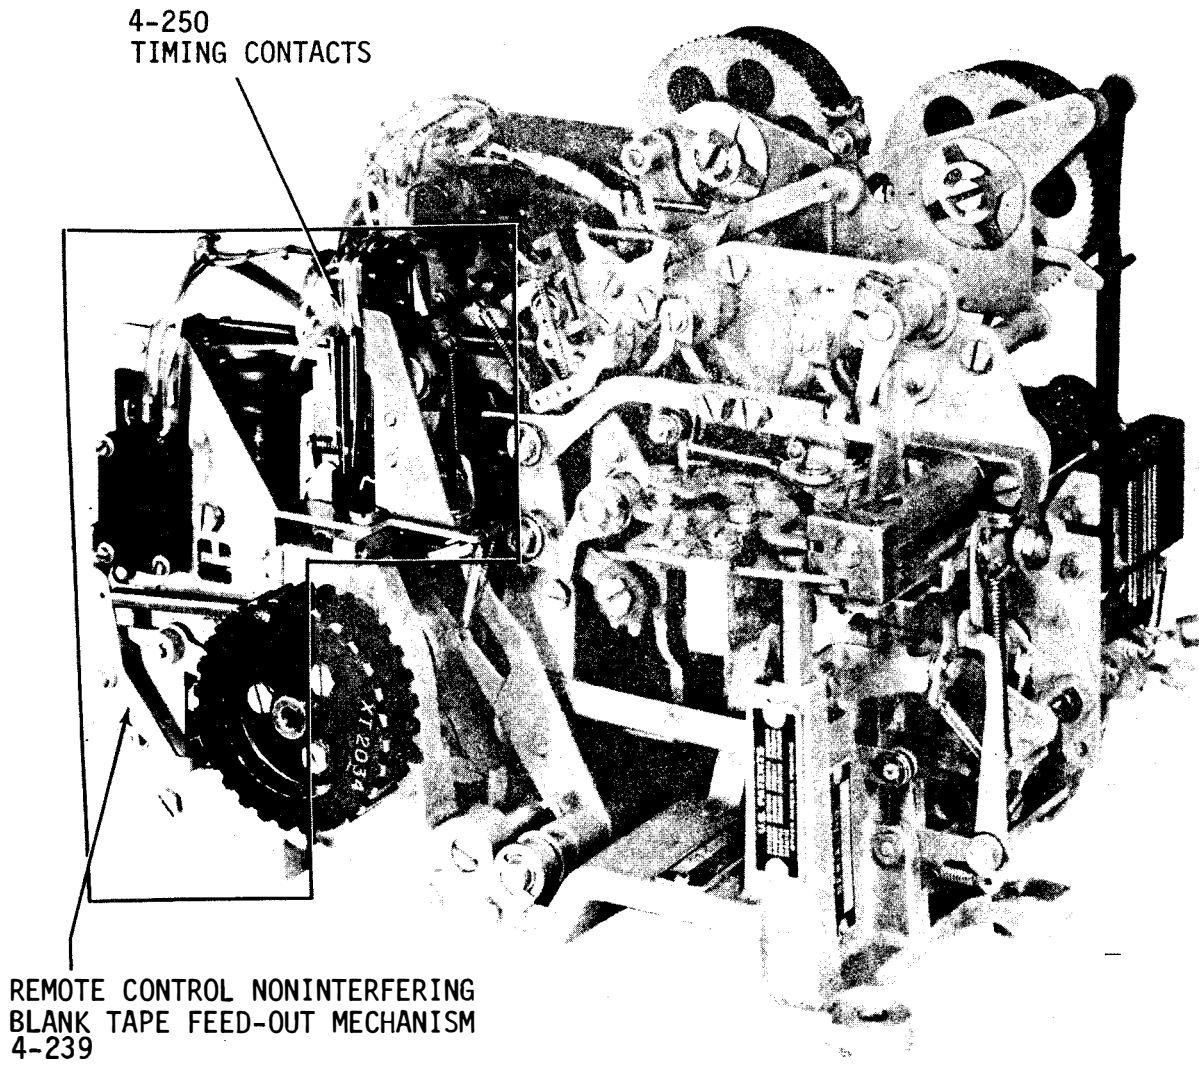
Remote Control Non-Interfering Tape Feed-Out Mechanism
